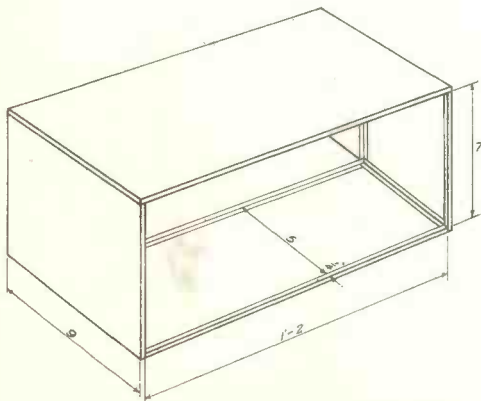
THE DIMENSIONED DRAWING OF THE CABINET.
